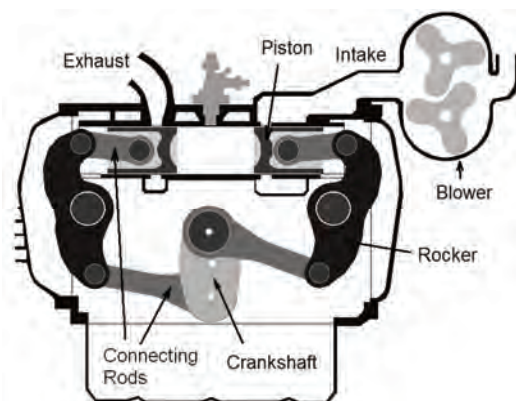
Kinematic linkage in the rocker Commer engine [1, 2]
